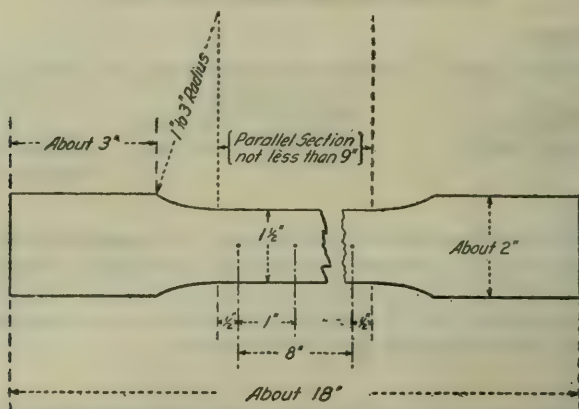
Form and dimensions of test specimen for tension and bending tests of plates, shapes, and bars.
